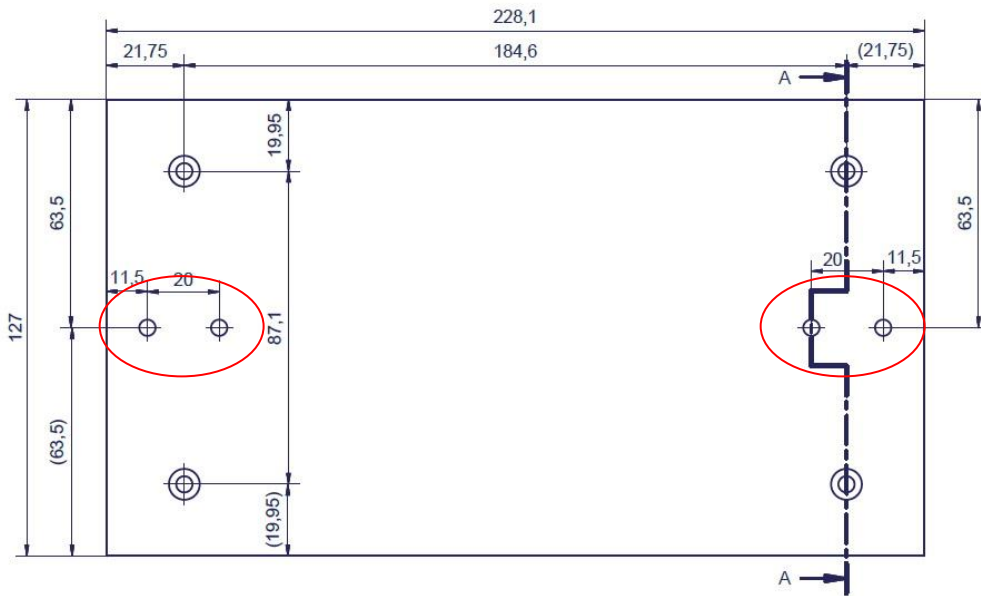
Bottom view of the IPC/ML71 (product image may vary)
